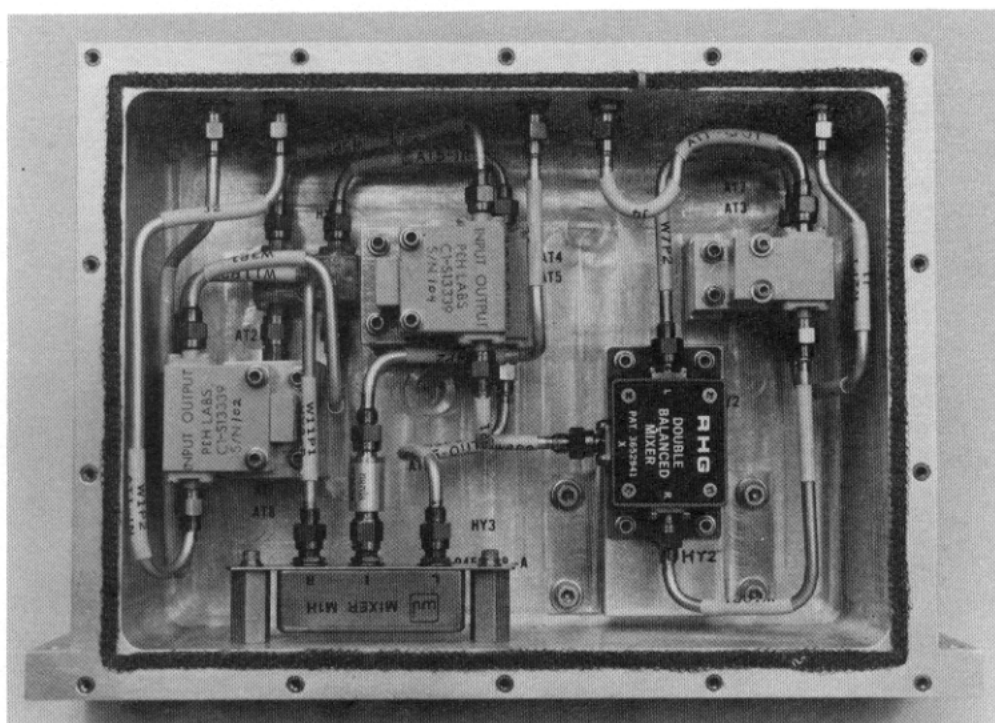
S- and X-band mixer subassembly of Portable Zero Delay Assembly. Same as Translator Assembly 9456791-3
